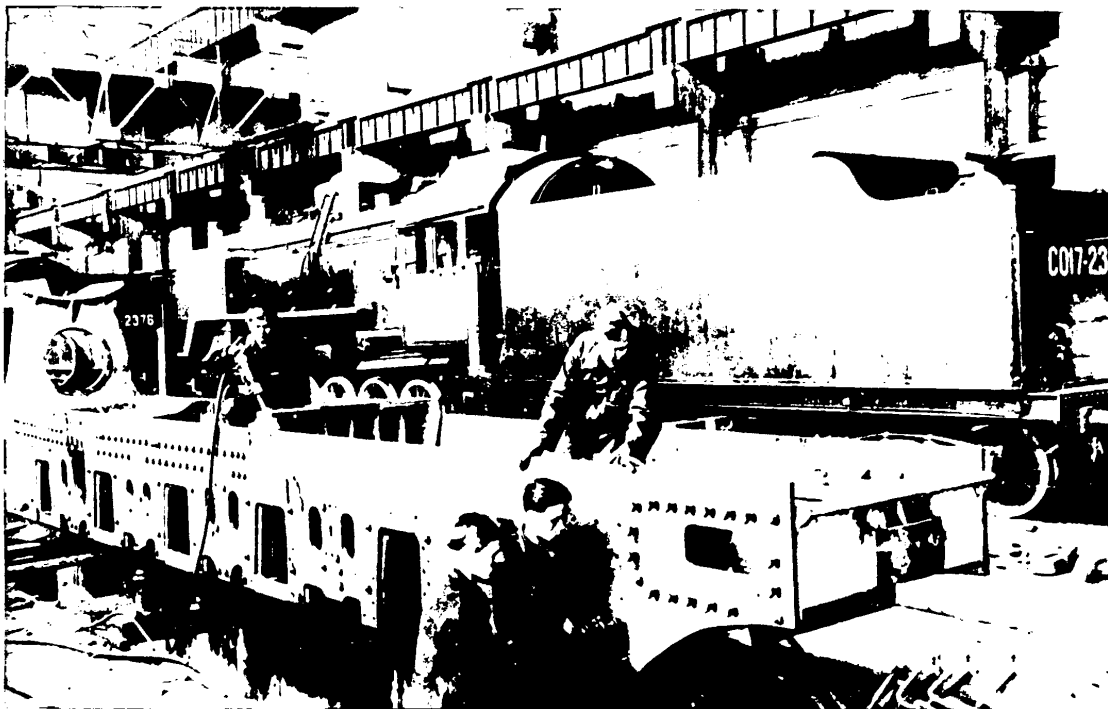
LOCOMOTIVE ASSEMBLY LINE AT THE SIBIRSKIY HEAVY MACHINE PLANT AT KRASNOYARSK. Note the pneumatic wrenches in use on the bolted, rolled steel frame. The boiler saddle and frame brackets appear to be of cast steel. The tender in the background is largely of welded construction.
